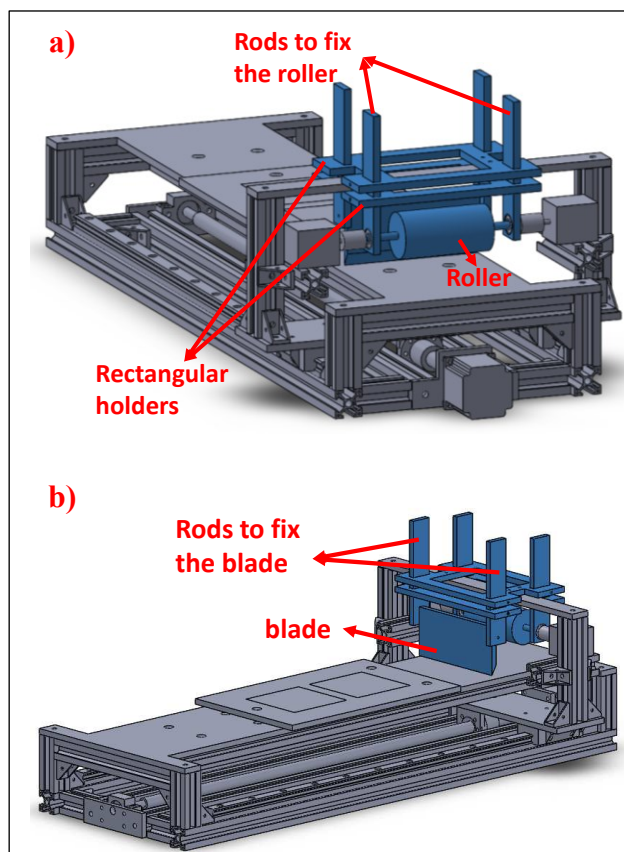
Connection of a) the roller and of b) the blade to the holders of the spreading system.
